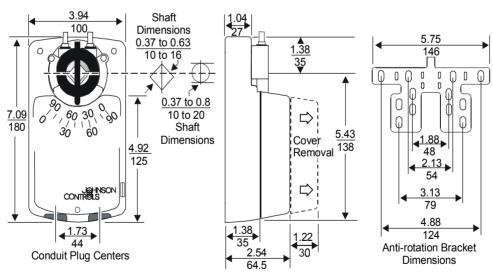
Actuator and Anti-rotation Bracket Dimensions, in. (mm)
